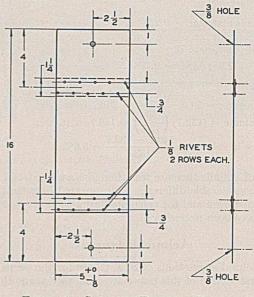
STANDARD EXPOSURE PANEL (Dimensions in inches)
